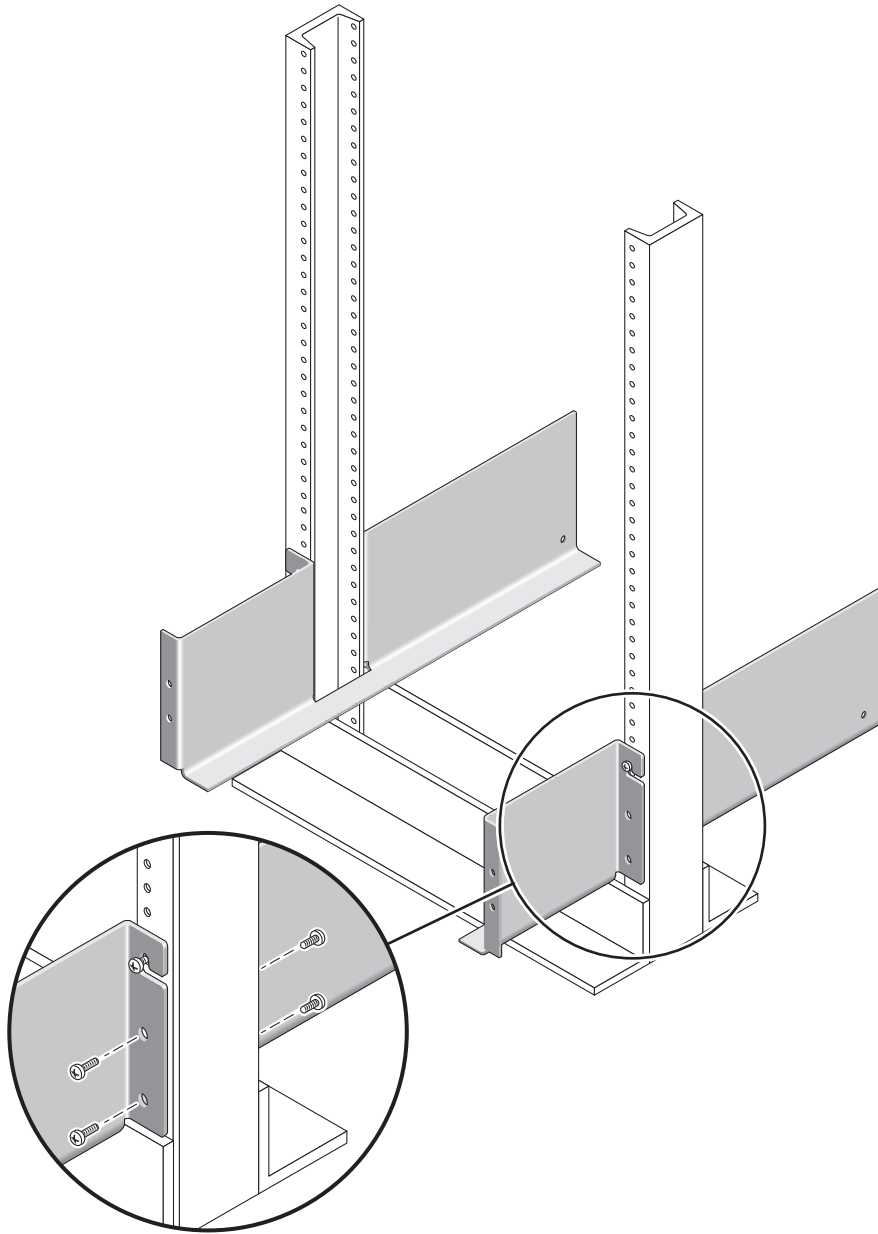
Inserting Screws in the Lower Mounting Holes of the Telco 2-Post Rack
